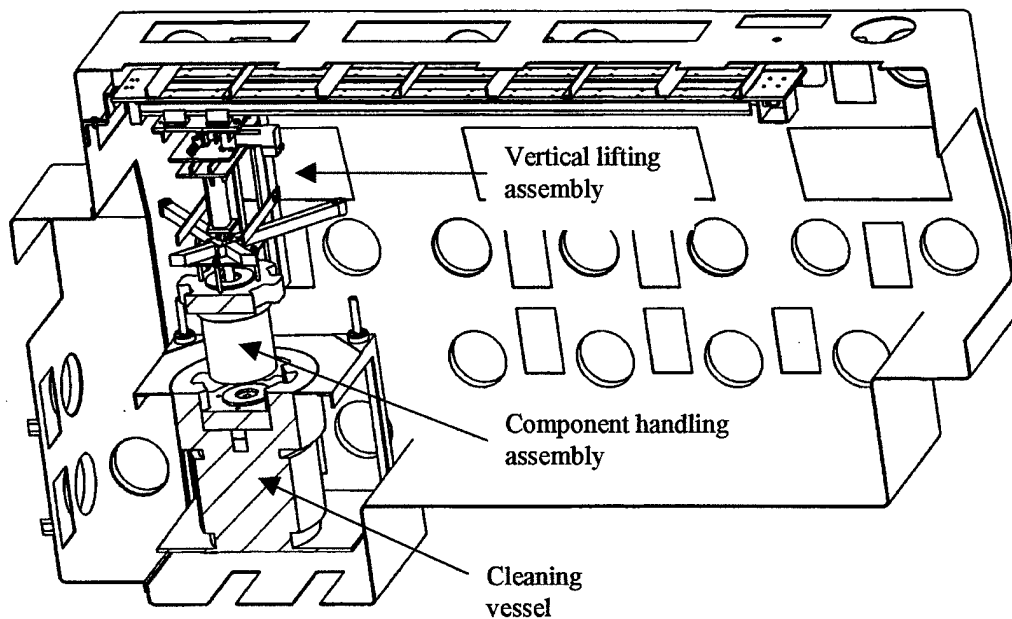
Cutaway, oblique view of the Pu component cleaning system and its radiological enclosure.
